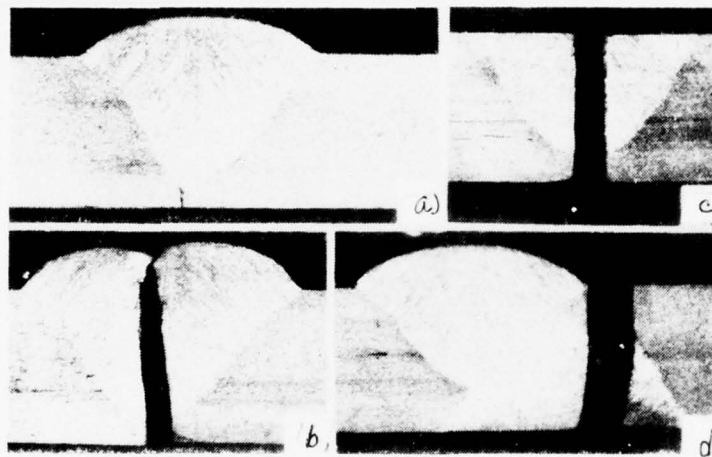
character of the fatigue failures of butt joints of low-carbon steel with concentrators with the asymmetric elongation: a) butting reinforced seam and poor fusion before testing; b) the same after fatigue failure; c) butt weld with poor fusion without strengthening; d) butt weld without flaw/defects with strengthening.
